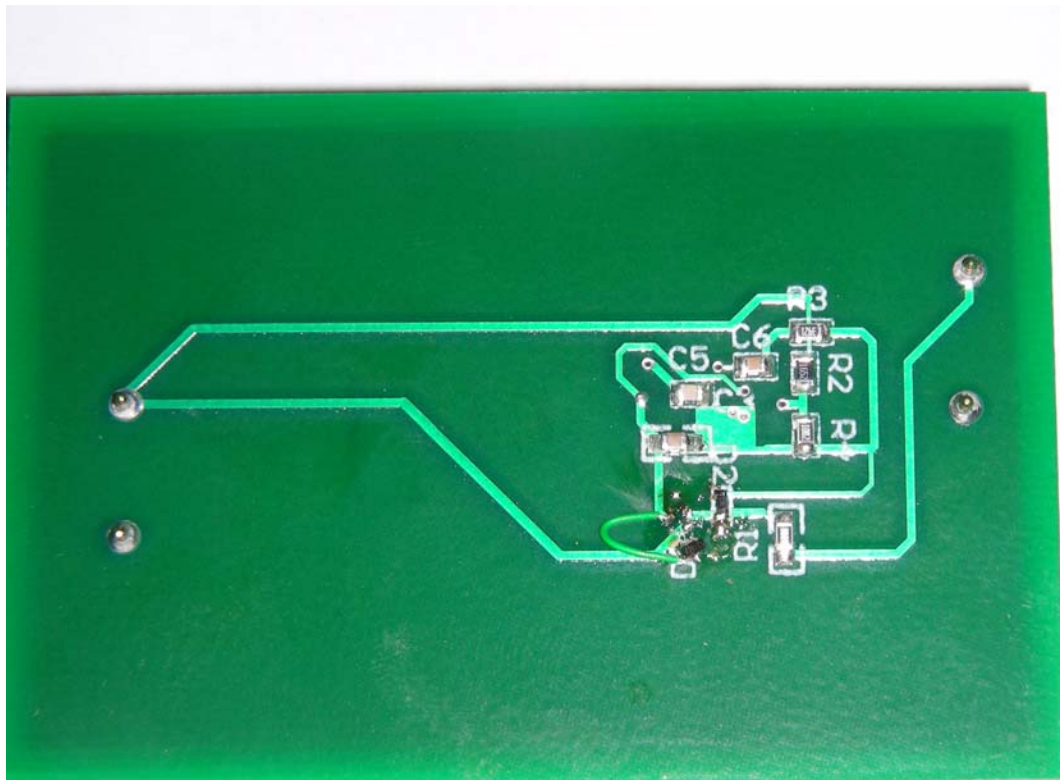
ISL97656 SEPIC TEST BOARD – BACK SIDE
